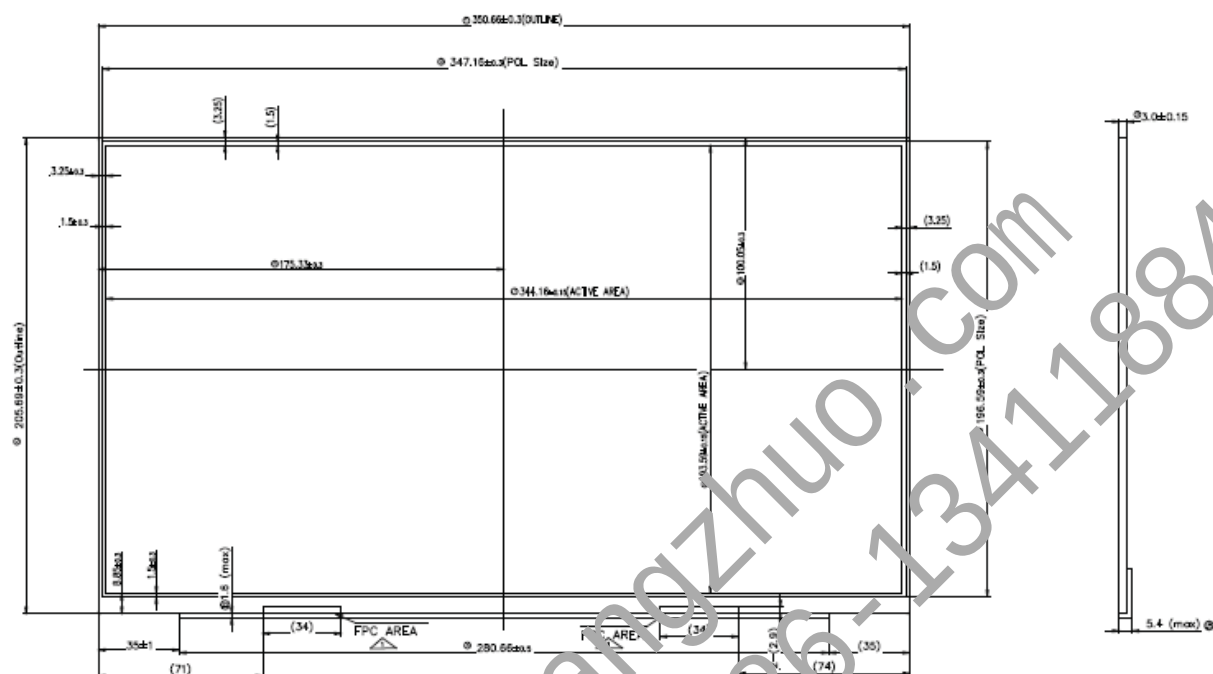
TTT-LCM Module Outline Dimension (Front View)
